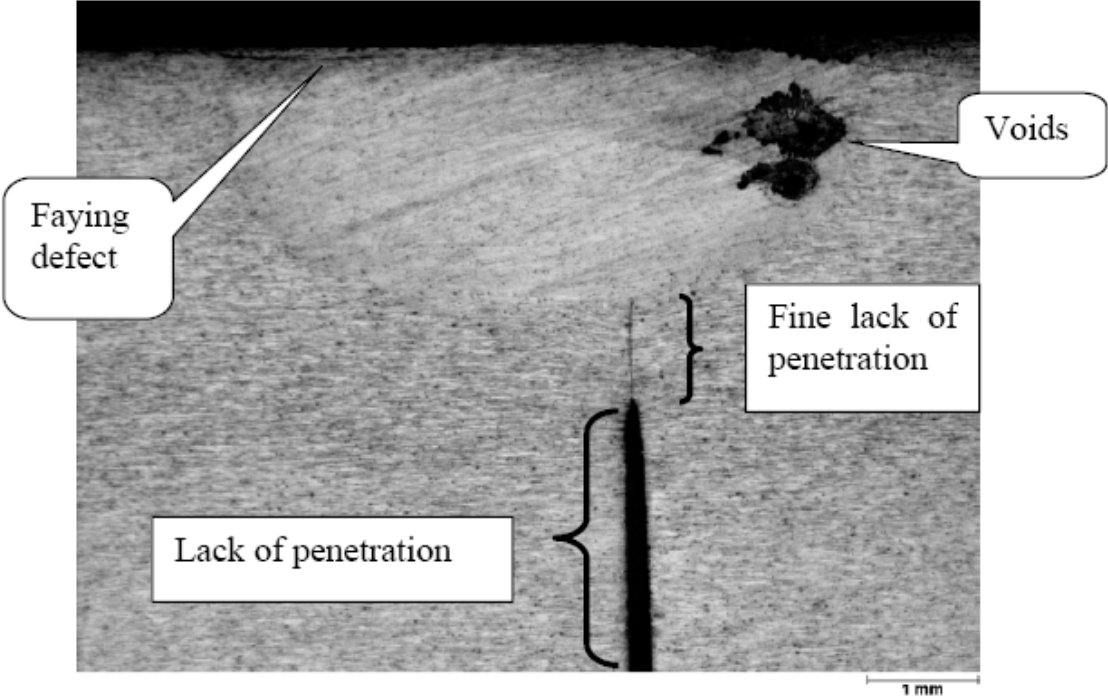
Macroscopic etch showing a faying surface defect, void, and LOP defect. Reproduced by permission TWI Ltd [28].
